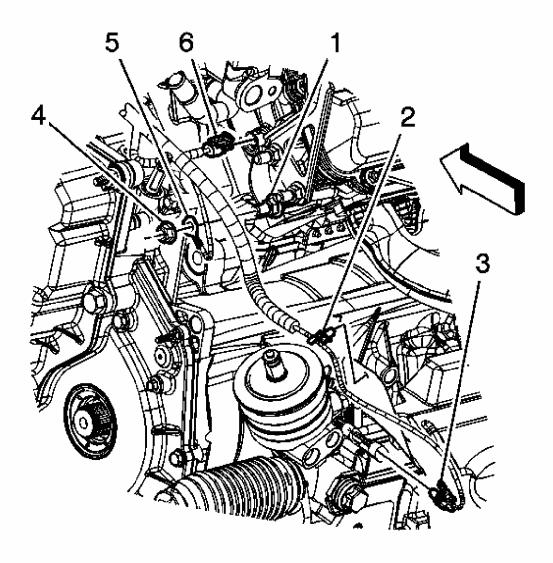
Engine Harness Electrical Connectors Courtesy of GENERAL MOTORS CORP.
